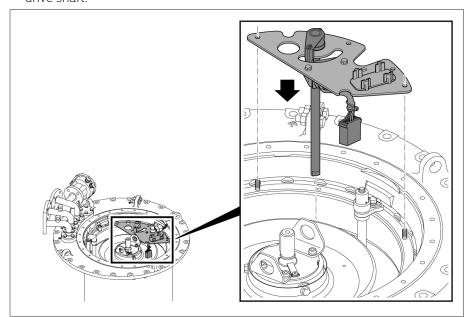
Mounting plate with tap-change supervisory device and the drive shaft
